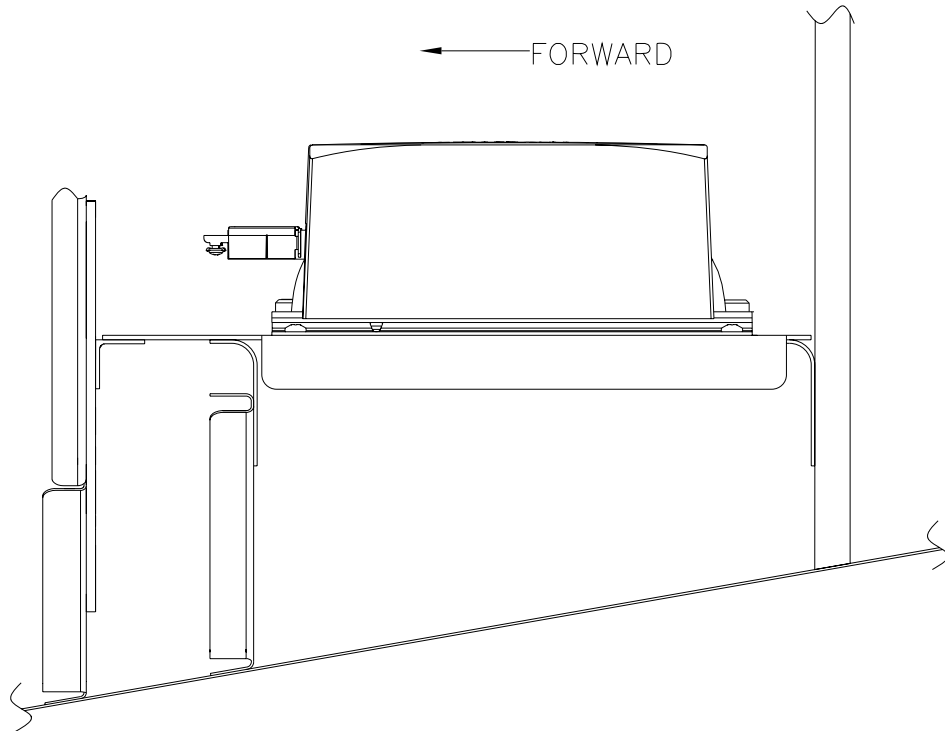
Plate, Angle Bracket Assembly Attachment to Existing Frame and Bulkhead Structure
